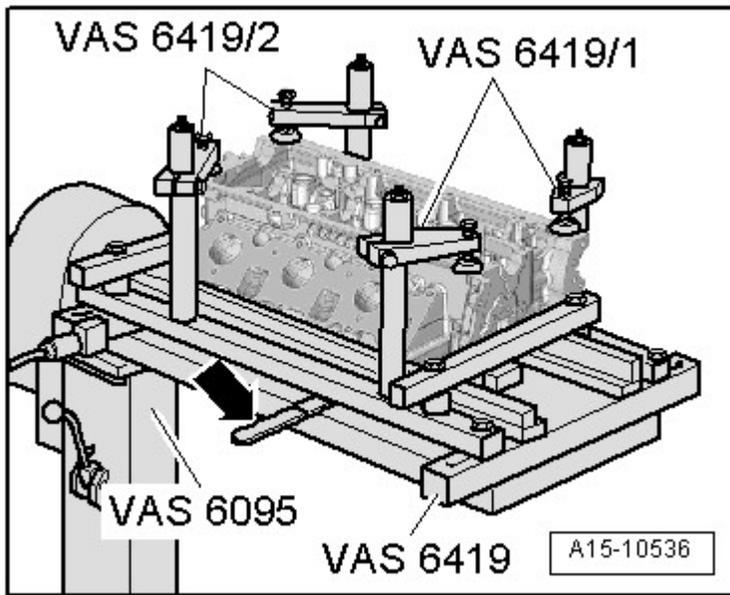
Sliding Air Cushion With Lever Under Combustion Chamber
